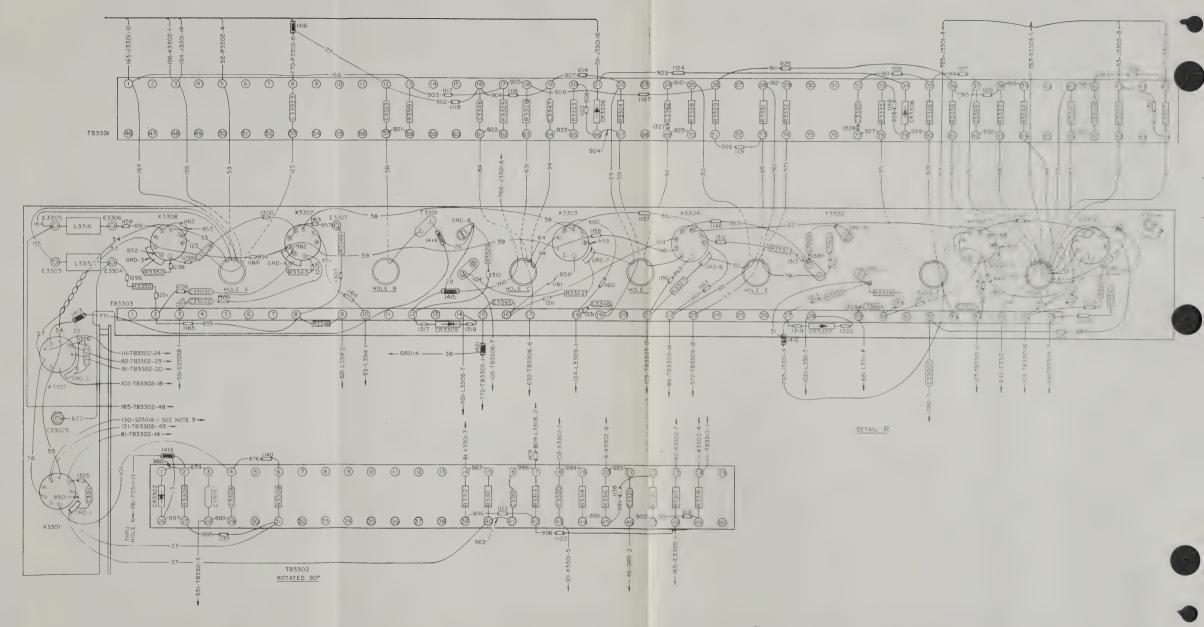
Channelizer Subassembly, Wiring Diagram (Sheet 4 of 5)
